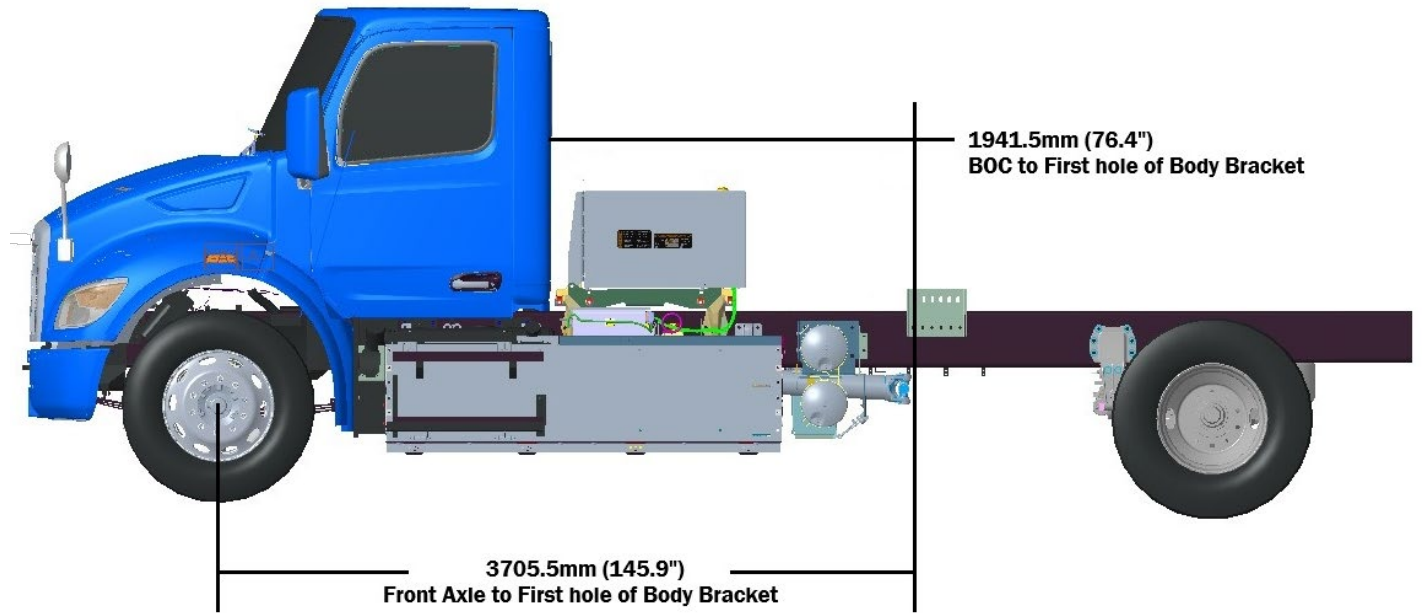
Body Mounting Brackets for 3 String Batteries
